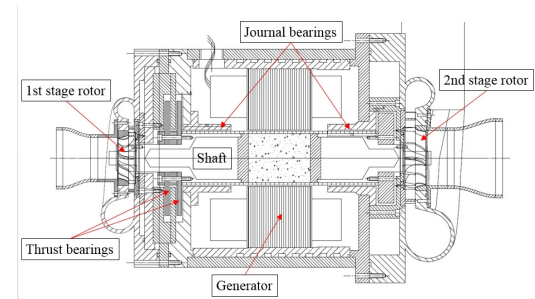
Bearing location and cross-sectional view of 2-stage radial turbine
